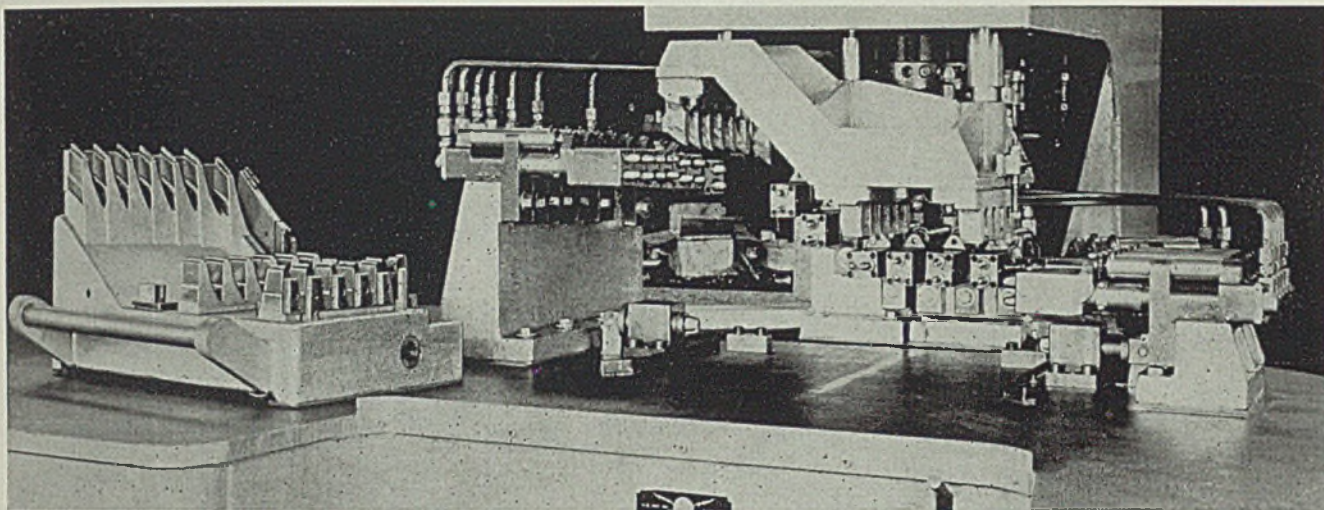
An empty jig is at left with vertical clamping fixture in raised position, welding guns in idle position. Note guides and stops on table to position movable jig and also the locating pins. Lever at right center foreground operates air cylinders which move the vertical clamping head
